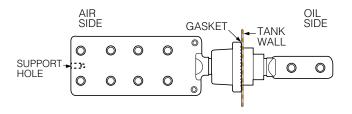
1210-2410 A, 1.2 kV class secondary bushing with clamping flange.
